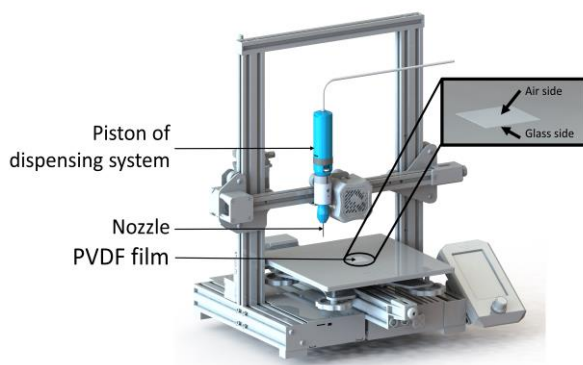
Modified version of traditional Fused Filament Fabrication (FFF) 3D printer by incorporating a dispensing system for solvent- evaporation-assisted 3D printing, enabling the printing of piezoelectric films.
